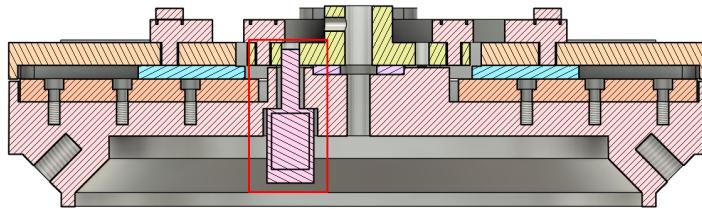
Air brake cross section, highlighting the solenoid in its un-powered extended state locking the crank (yellow cross-section).
